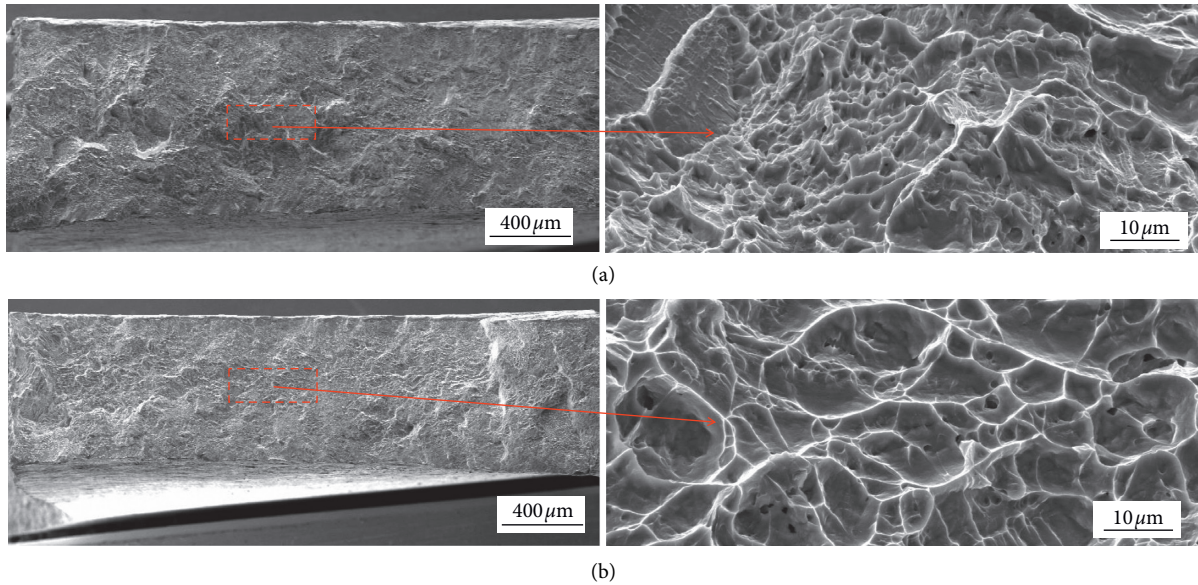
Fracture morphology of tensile fracture with different shielding gases: (a) Ar; (b) He.
